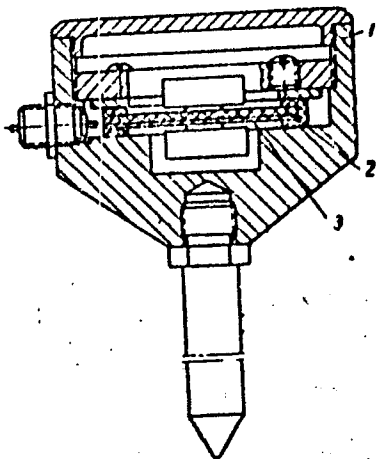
1- casing; 2- piezoelement; 3- metallic plate
